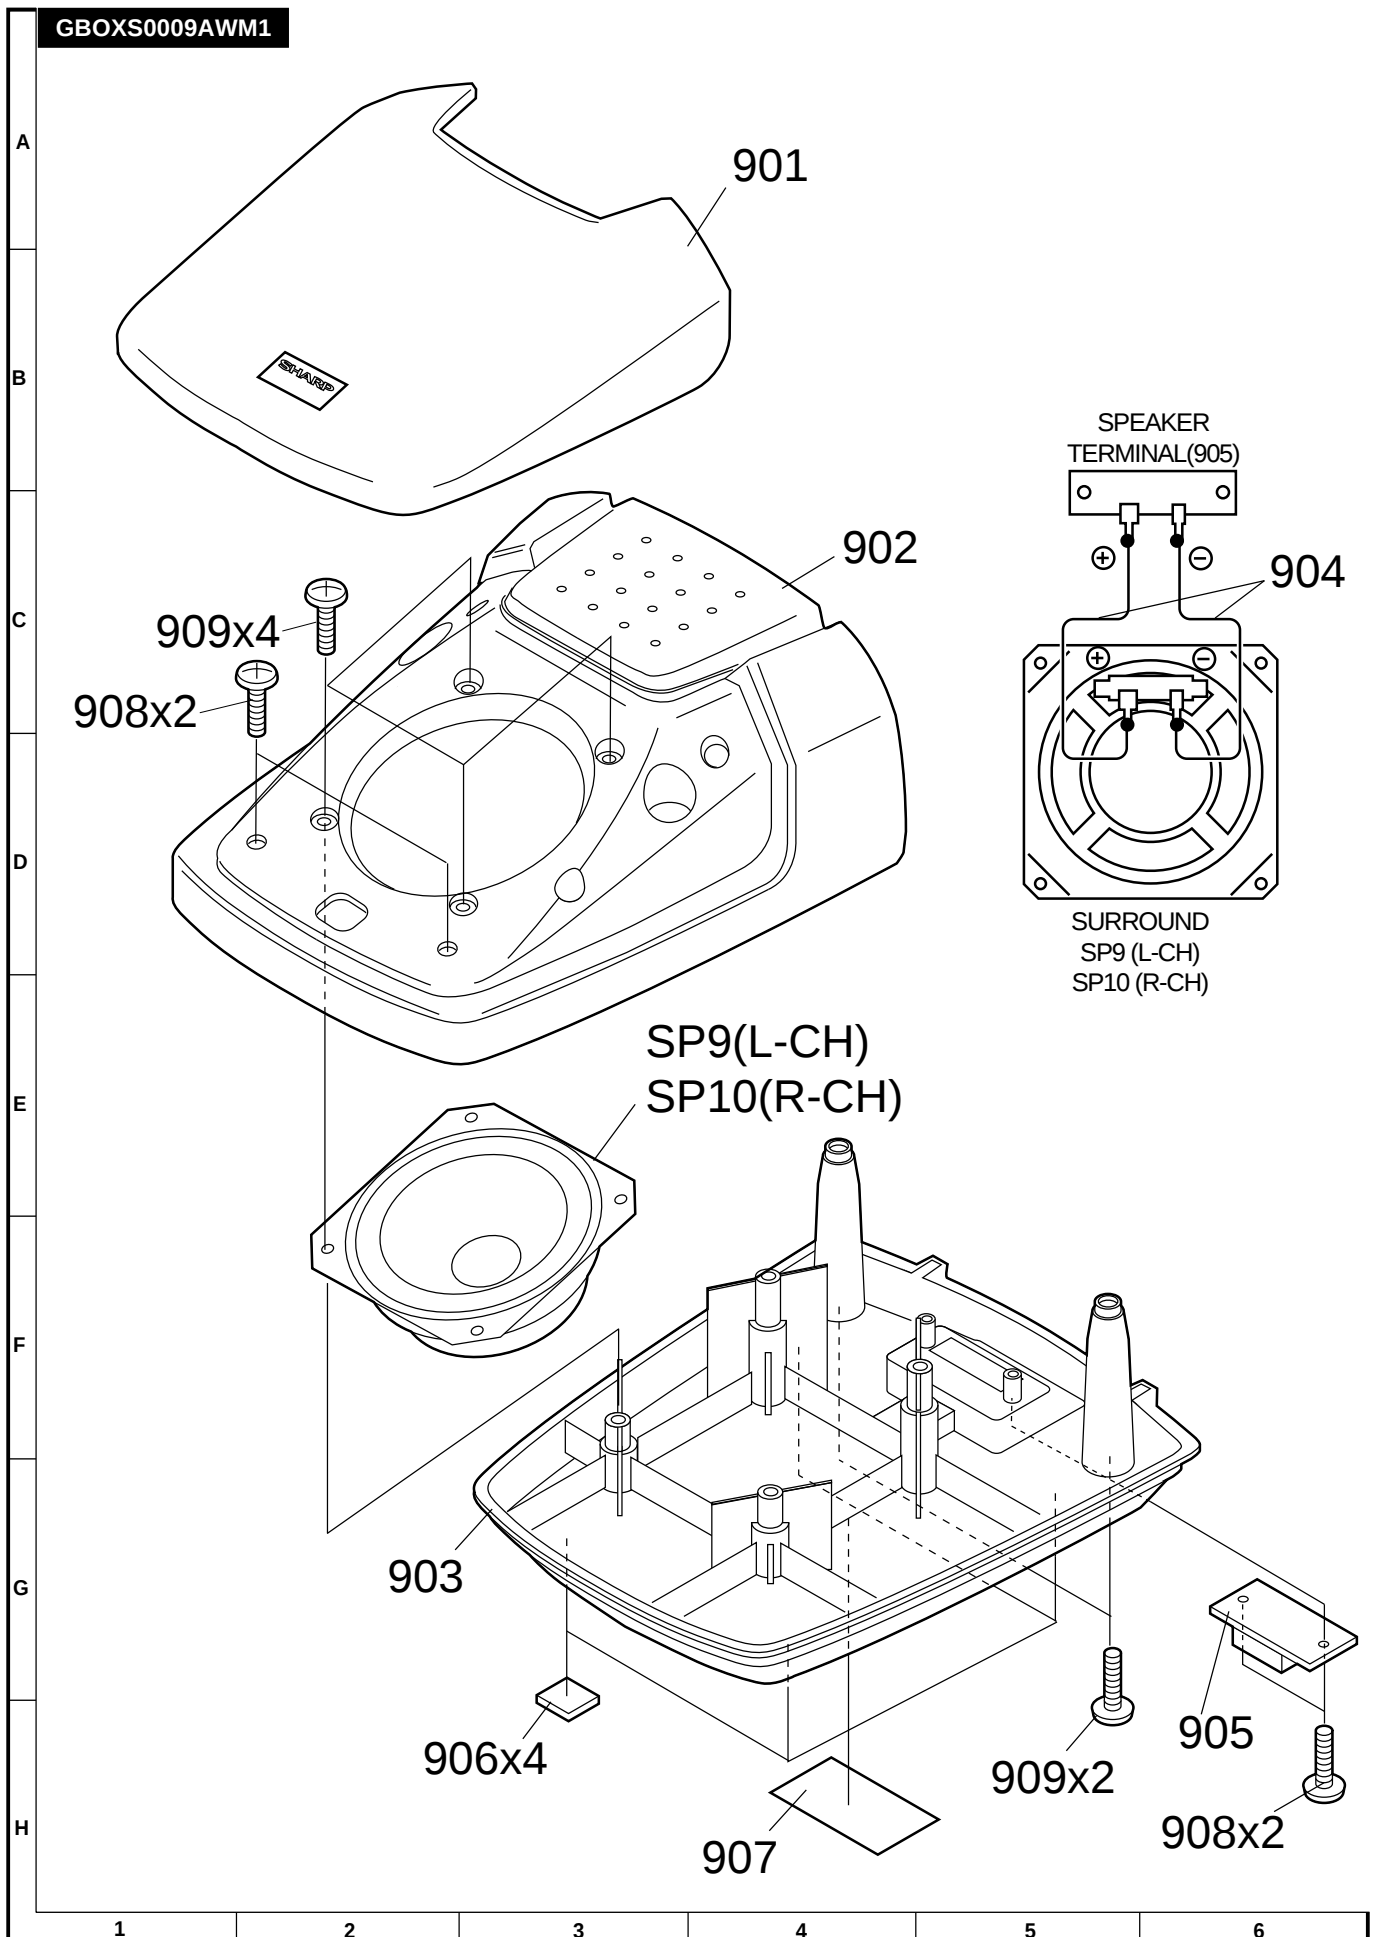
SURROUND SPEAKER EXPLODED VIEW
